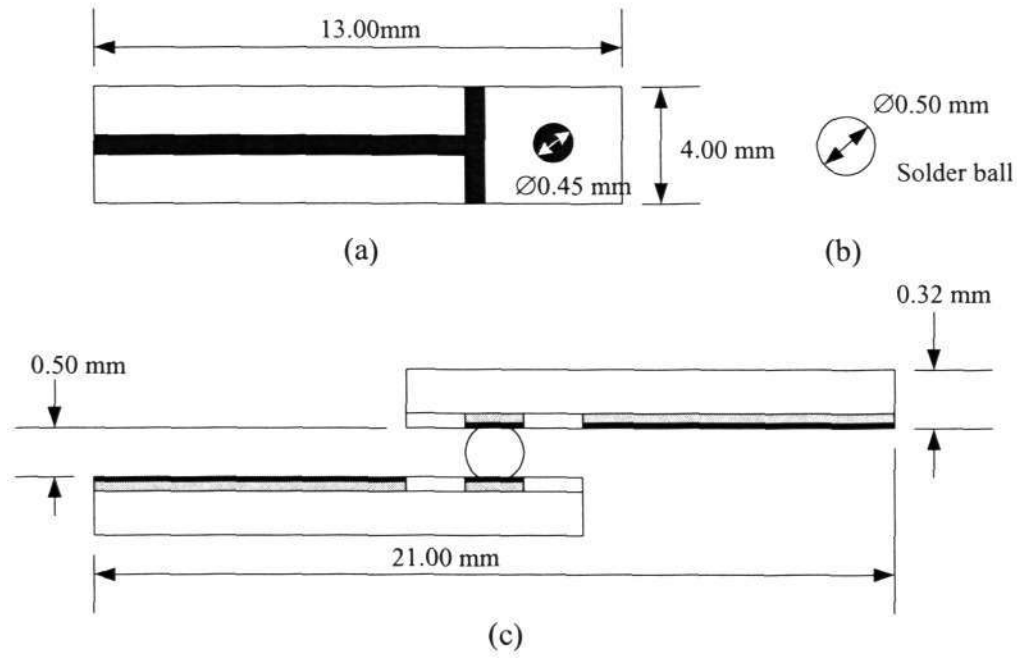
Schematic diagram of the FR4-solder joint specimen. (a) The FR4-substrate with Cu pad coated with Ni/Au. (b) 95.5Sn-3.8Ag-0.7Cu solder ball (c) FR4-solder joint specimen.
